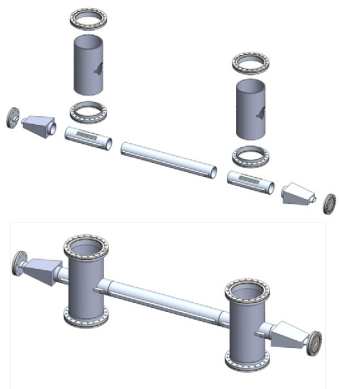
Exploded view of the middle straight dummy chamber assembly showing all major components.
